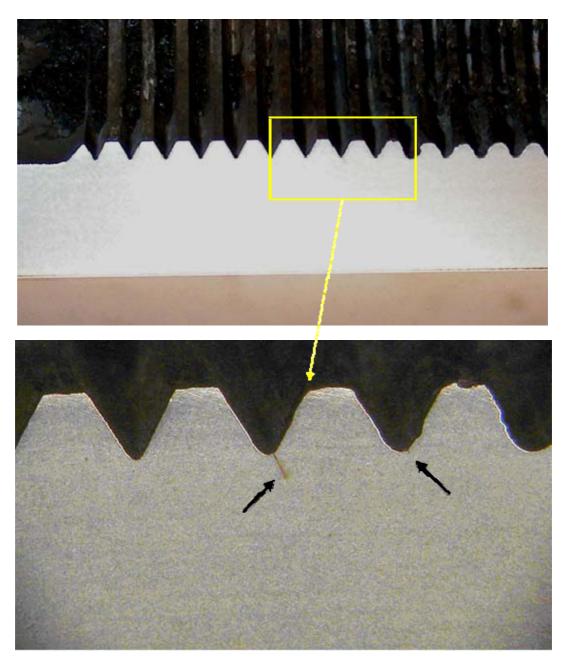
Left Retract Actuator Piston Rod. Small crack in last two engaged threads (at arrows).
